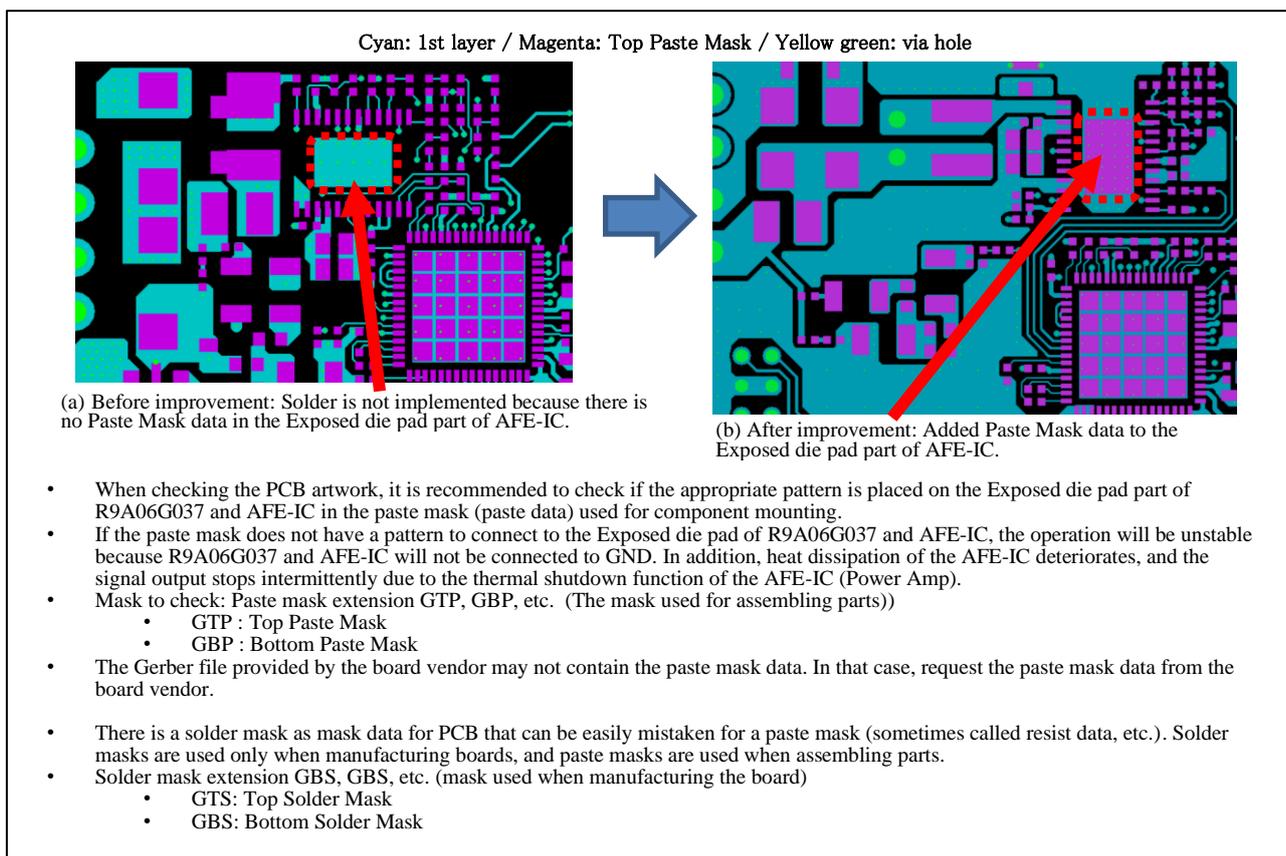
Example of checking the paste mask (paste data) used for component mounting
